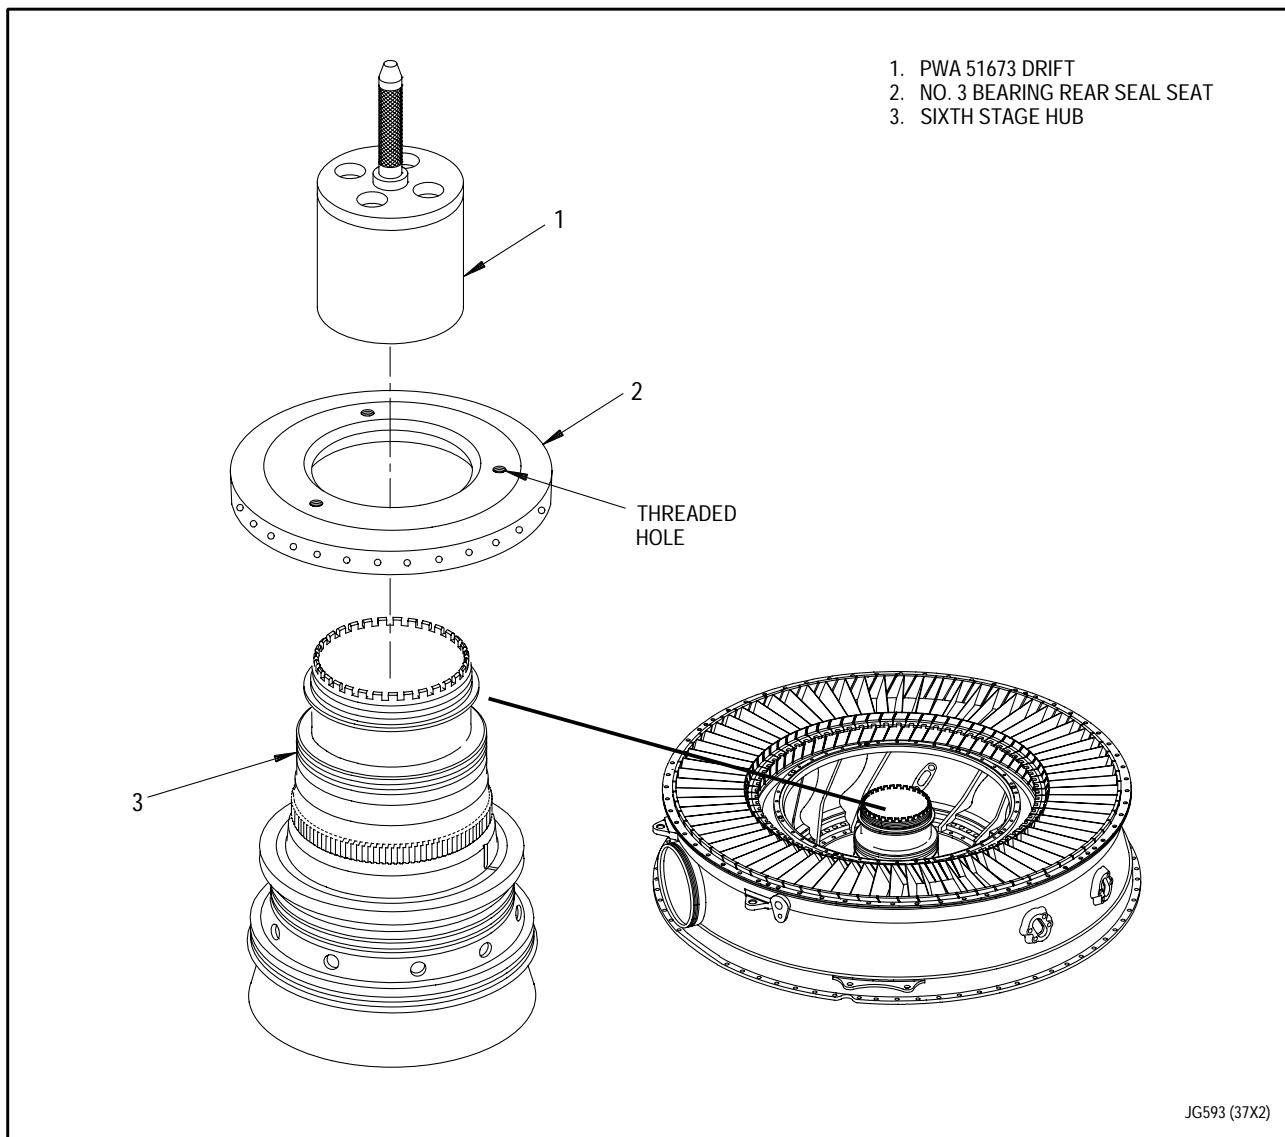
No. 3 Bearing Rear Seal Seat - Installation
